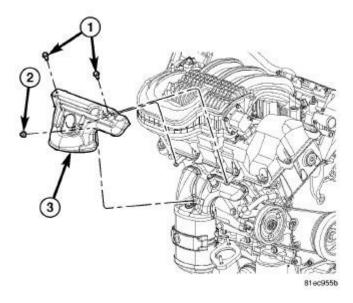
Rear Maniverter Heat Shield Courtesy of CHRYSLER LLC
